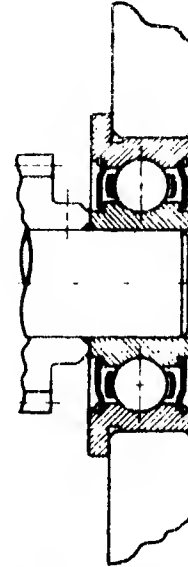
Flanged bearings permit use of through-bore housings, eliminating need for shoulders inside housing bore, and provide solid mounting for axial control.
